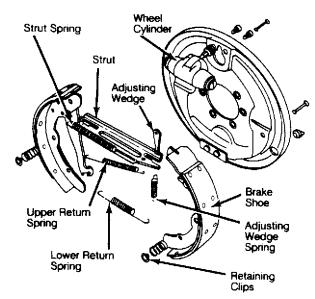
Identifying Rear Brake Components (Typical) Courtesy of Volkswagen United States, Inc.
